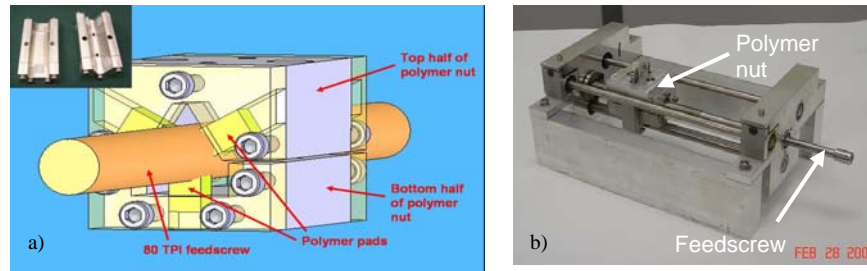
a) Polymer nut, top and bottom halves shown in inset b) Complete feedscrew drive mechanism.
